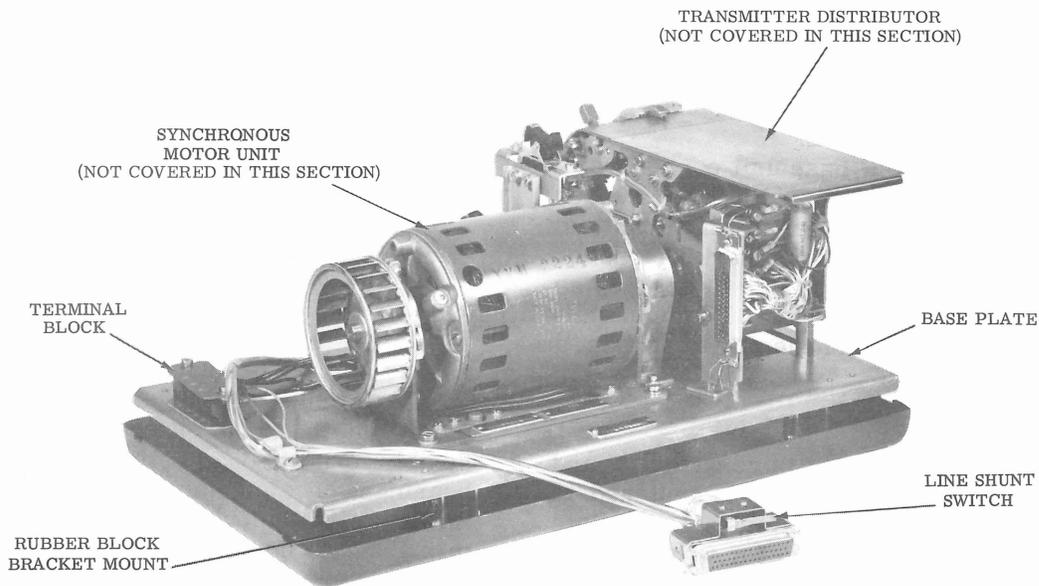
Standard 35 Transmitter-Distributor Base with Cover Removed, and with Single Contact Transmitter Distributor and Synchronous Motor Unit in Place
